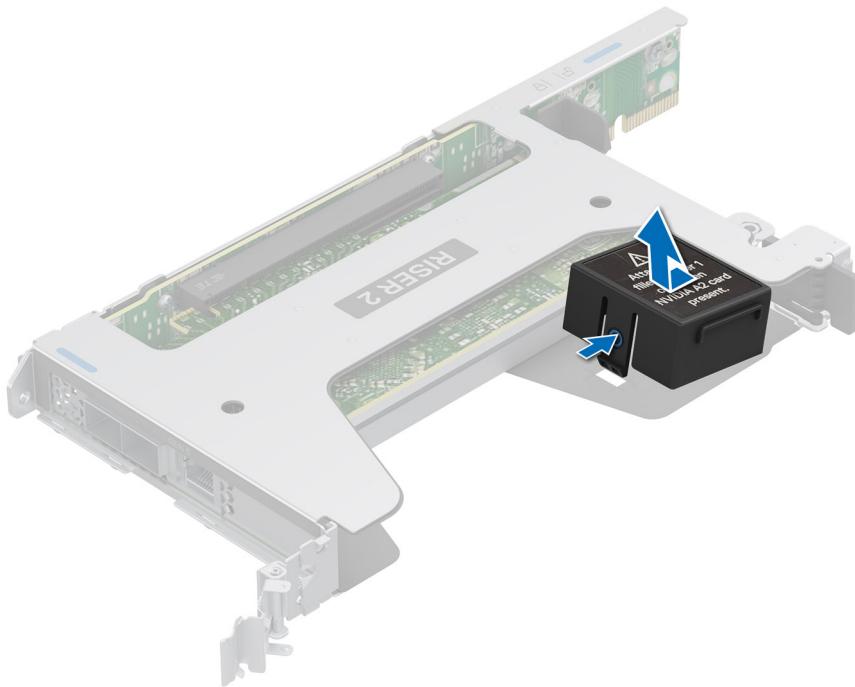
Removing GPU blank from the rear expansion card riser 2q
